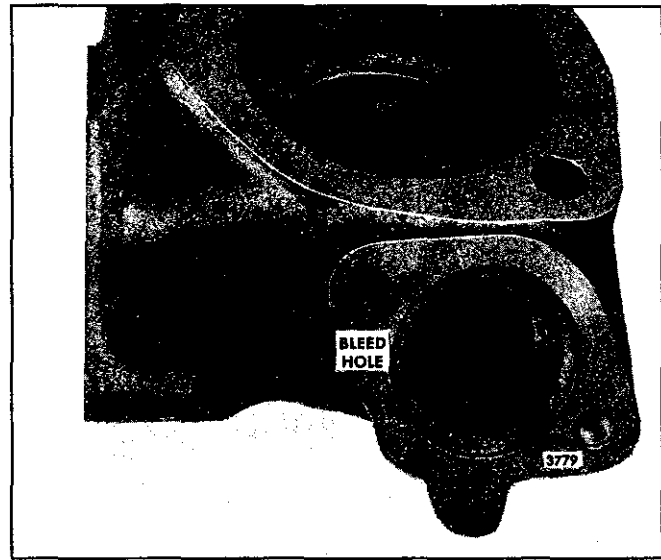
Bleed Hole in Thermostat Housing (V-Type Engine)
